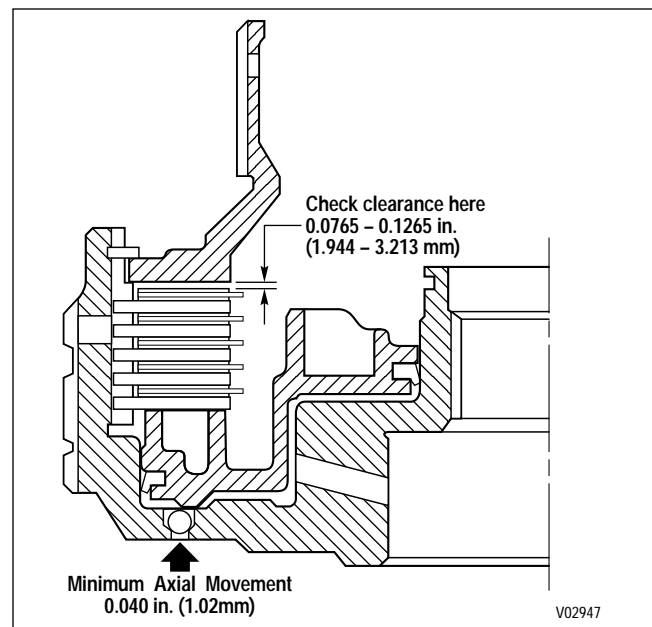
Forward Clutch Clearance Check Point (Models Without Wave Plate)
